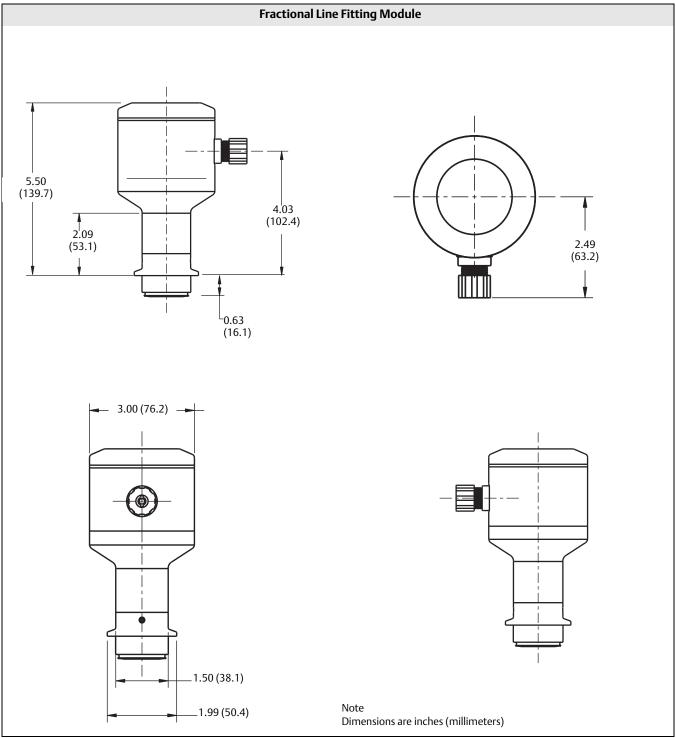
Rosemount 4500 Hygienic Pressure Transmitter Dimensional Drawings
